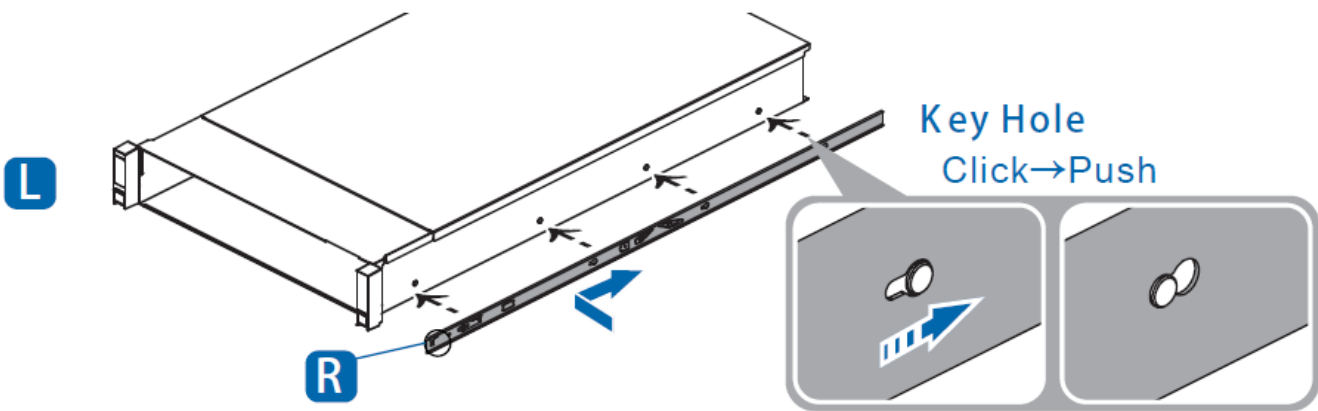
Rail Kit - Inner Rail Attachment to Chassis
